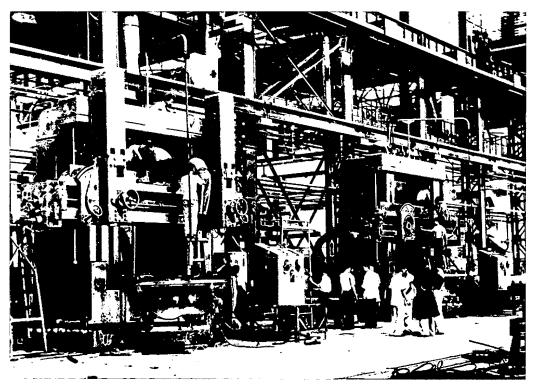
Communist China: Assembly of Vertical Boring Mills with Tables 10 Feet in Diameter at the Wu-han Heavy Machine Tool Plant
